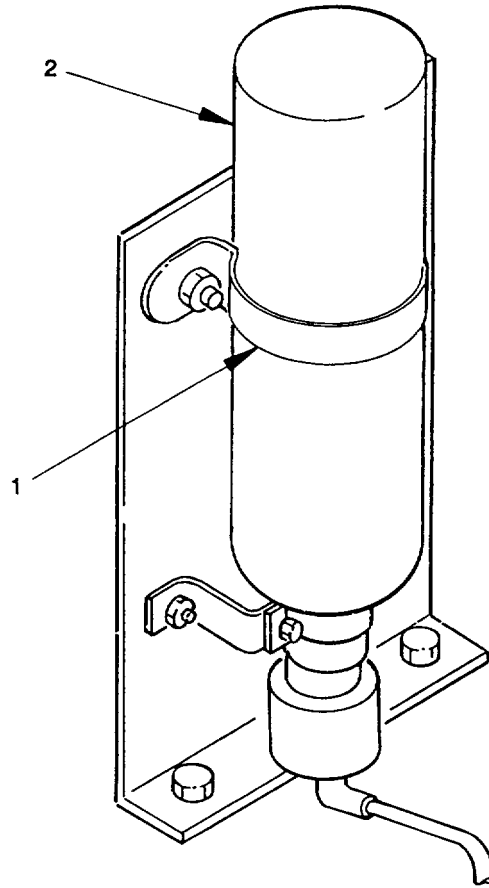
Cold Pack Starting Aid, Diesel Engine, Remove/Install.
